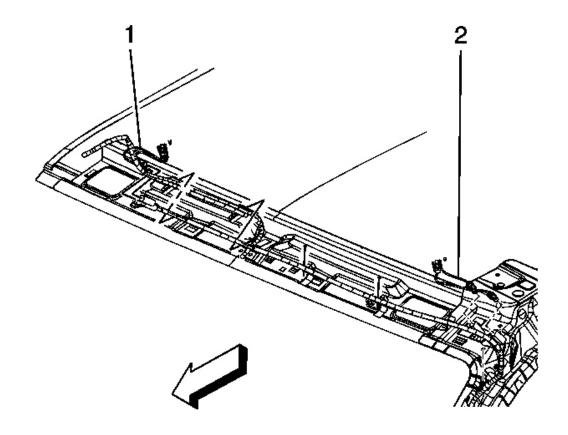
View Of Coax Cable & Digital Radio Connectors (UE1, U2K) Courtesy of GENERAL MOTORS CORP.
